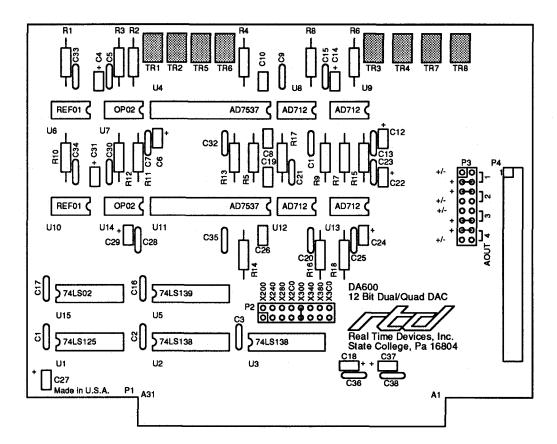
Board Layout Showing Calibration Trimpots
